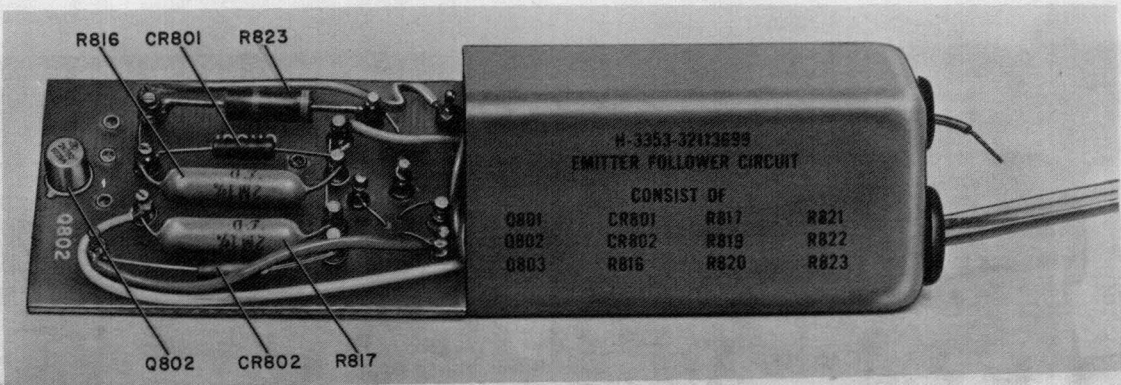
Emitter Follower Assembly, MP801, Front View
